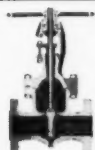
Gate valve, 600 lb at 850 F. (1440 lb WOG), with hard-surfaced seats and wedge, ball bearing yoke, flanged ends. Sizes 2½" to 12".
